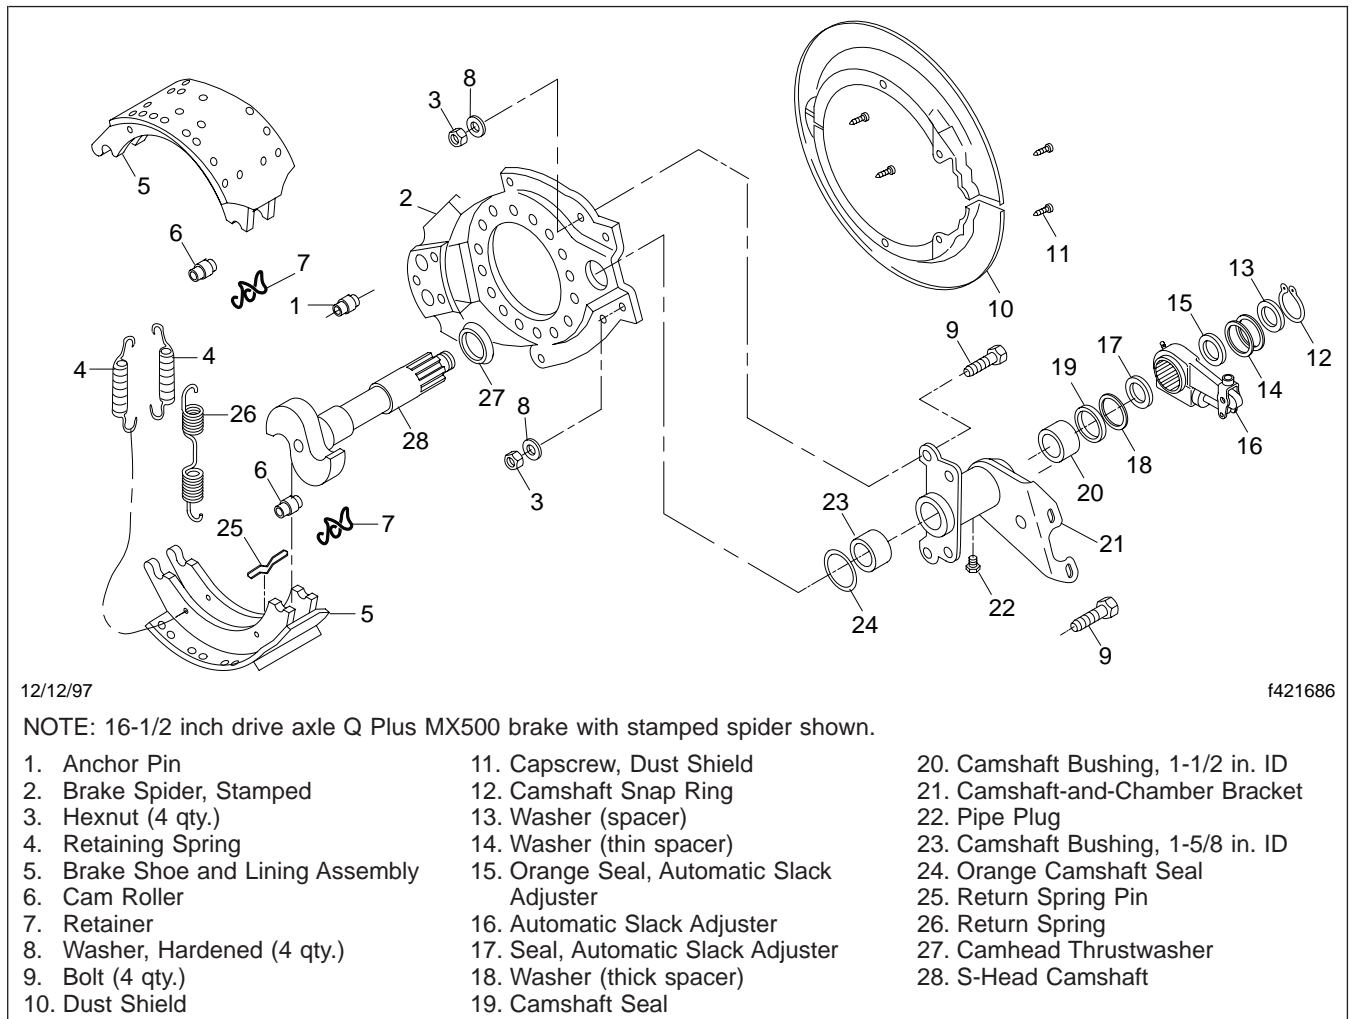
, Q Plus MX500 Brake (with stamped spider)
